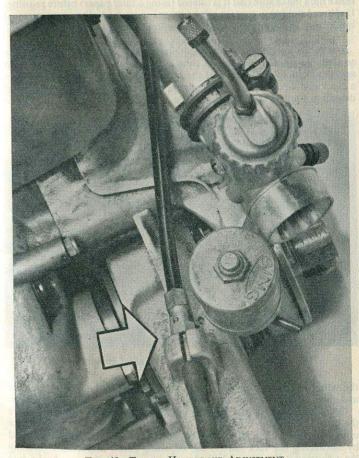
TROJAN HANDBRAKE ADJUSTMENT
